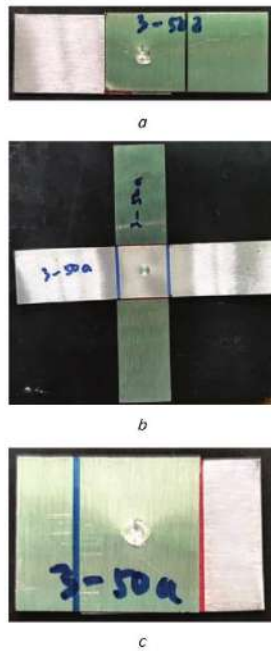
Micro-Friction Stir Spot Welding weld results for test specimens: a – shear tensile; b – cross tensile; c – metallography
